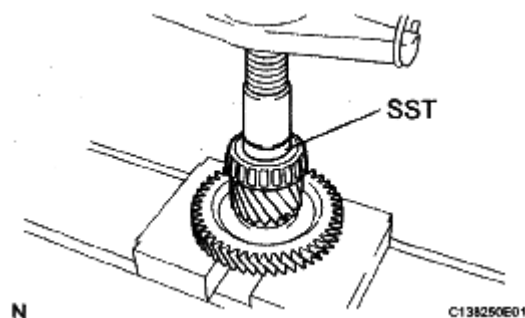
Installing Counter Driven Gear Front Tapered Roller Bearing
